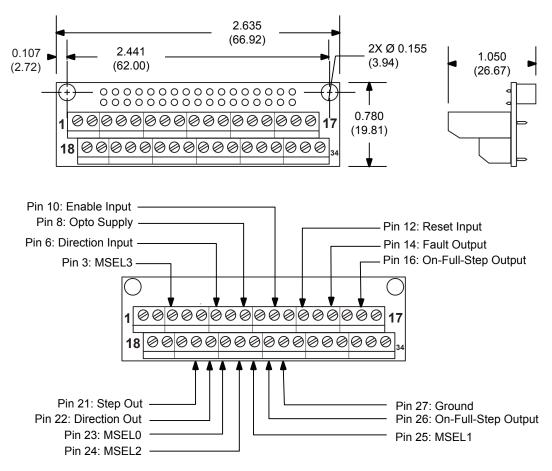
BB-34-4P Dimensions and Pin Configuration
